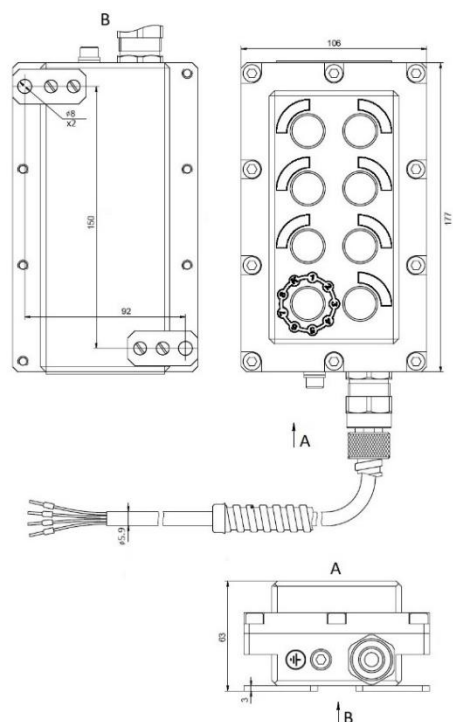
Overall dimensions of the Pushbutton Panel MV-150V
